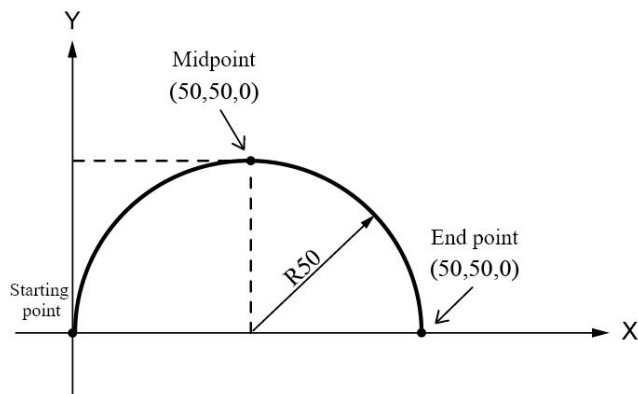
Three-dimensional circular arc drawing plane circular arc
